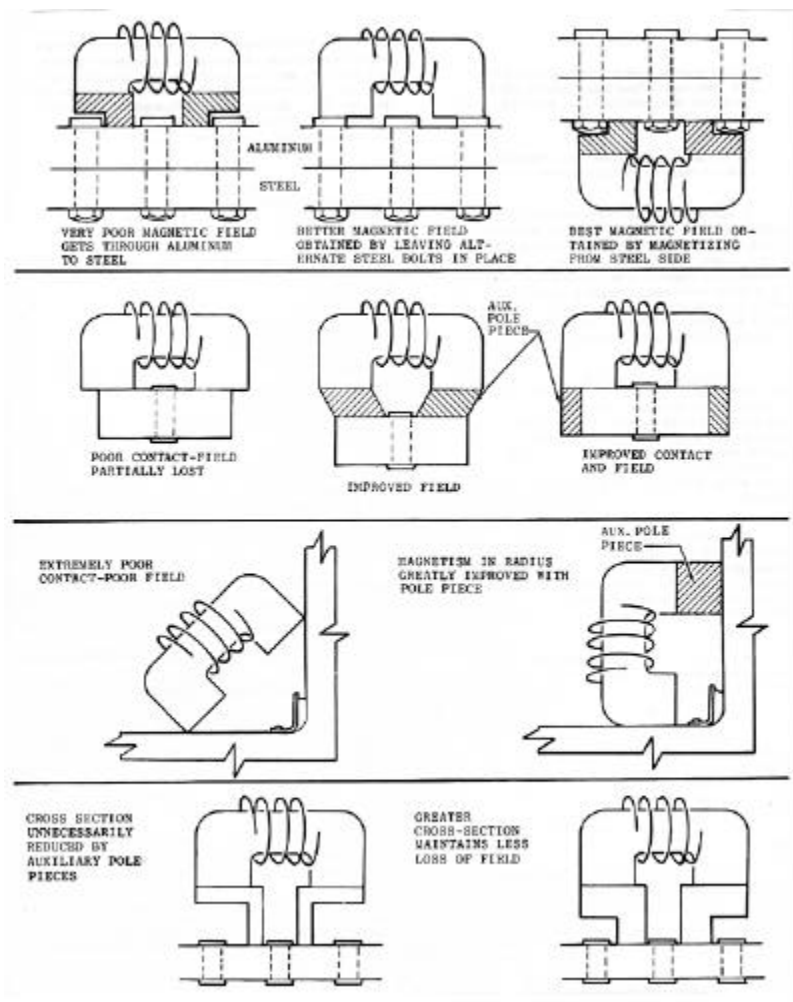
Using Pole Pieces to Improve Magnetic Contact.
